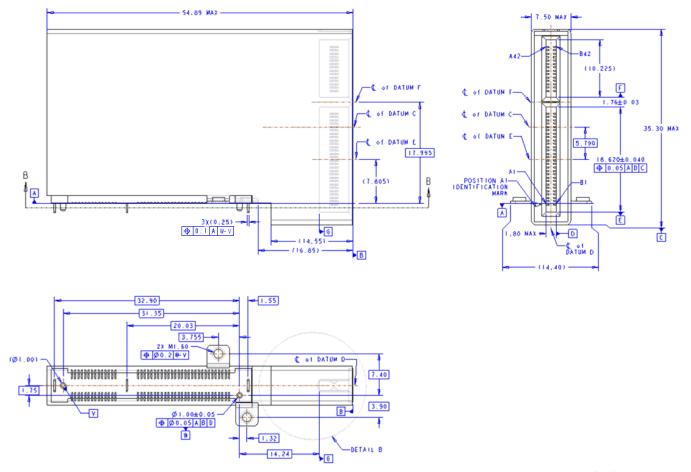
2C RIGHT ANGLE ORTHOGONAL SMT CONNECTOR DIMENSIONS (MM)
